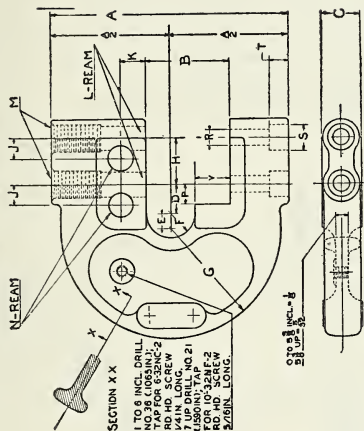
American Gage Design Standard adjustable snap gages, details of construction
